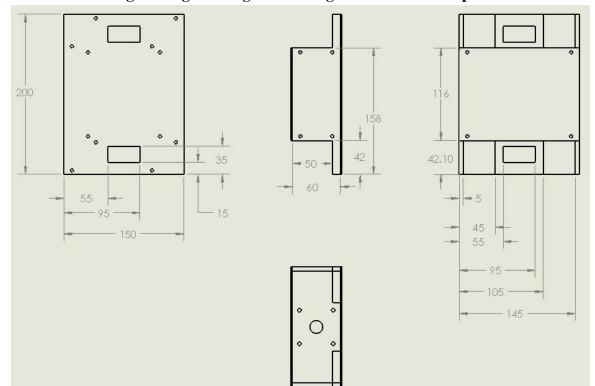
Engineering drawing for the magnet-attached concept
